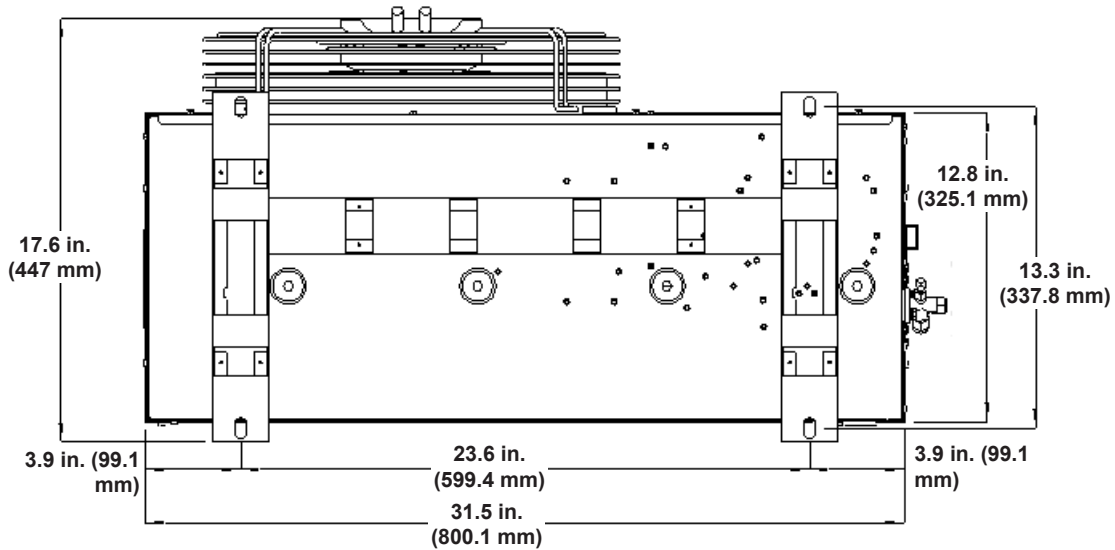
Condenser Mounting Interface (bottom view looking up), SRCOOLDXRW12
